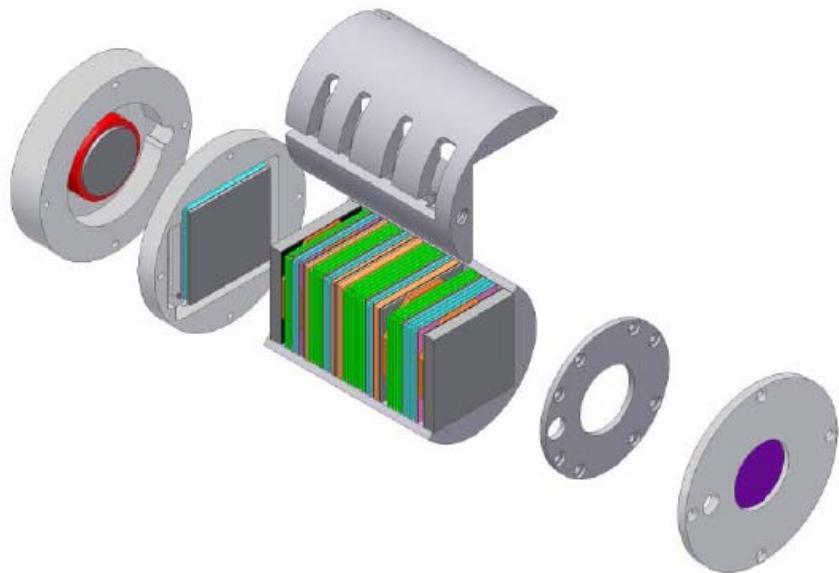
Mechanical assembly of the LCTF. From left: the pre-filter, the LCPR and the multistage LC Lyot filter
